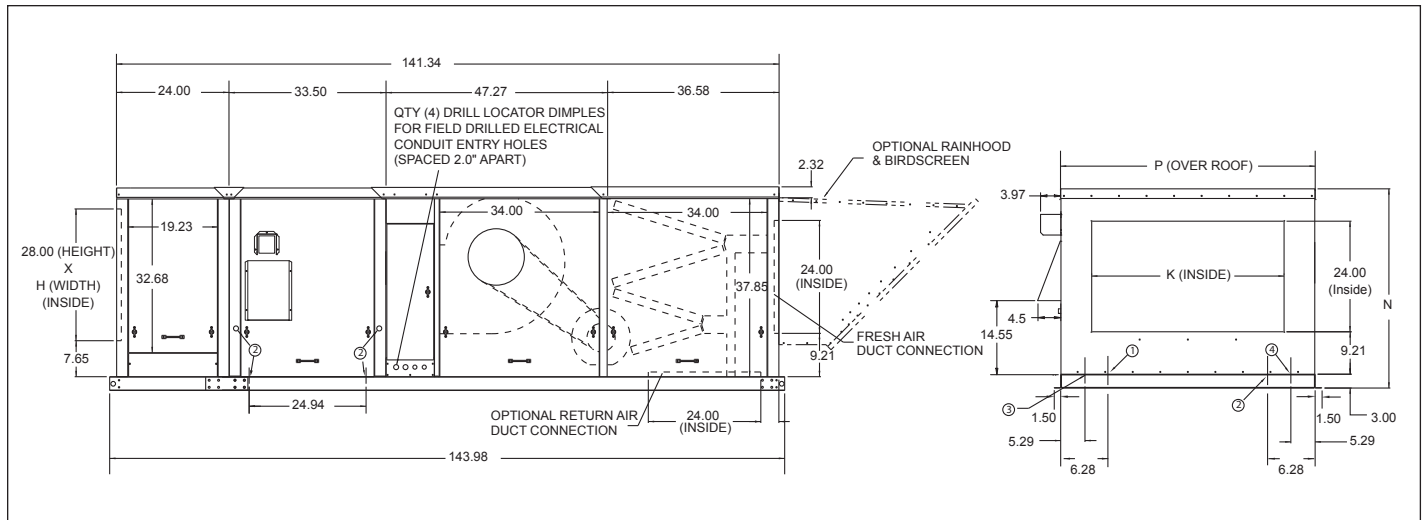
HPP Outdoor EXTENDED Blower Cooling & Downturn Unit Dimensions (Blower Type I, J or K)
